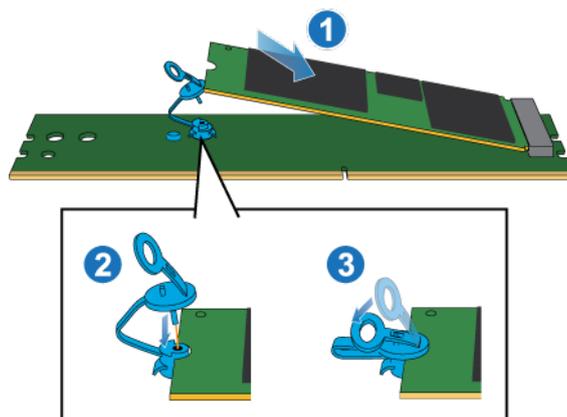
Installing the internal M.2 boot modules into the M.2 boot module adaptor
